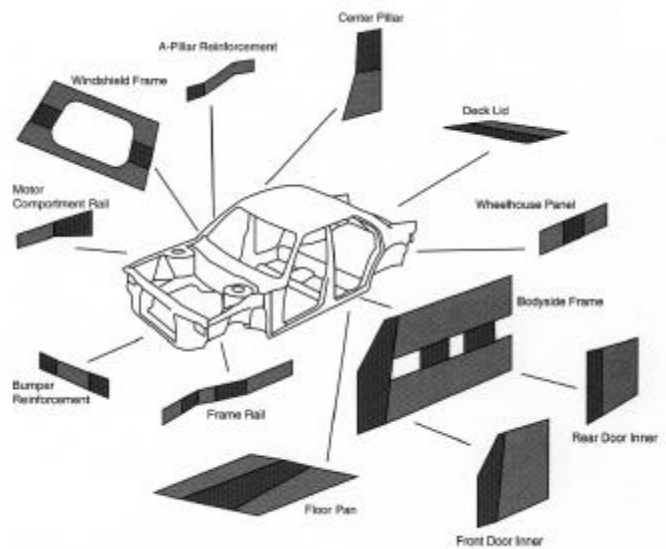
EXPLODED VIEW OF CURRENT OR POTENTIAL TAILOR WELDED BLANK AUTOMOTIVE BODY COMPONENT (AUTO/STEEL PARTNERSHIP, 1995).
